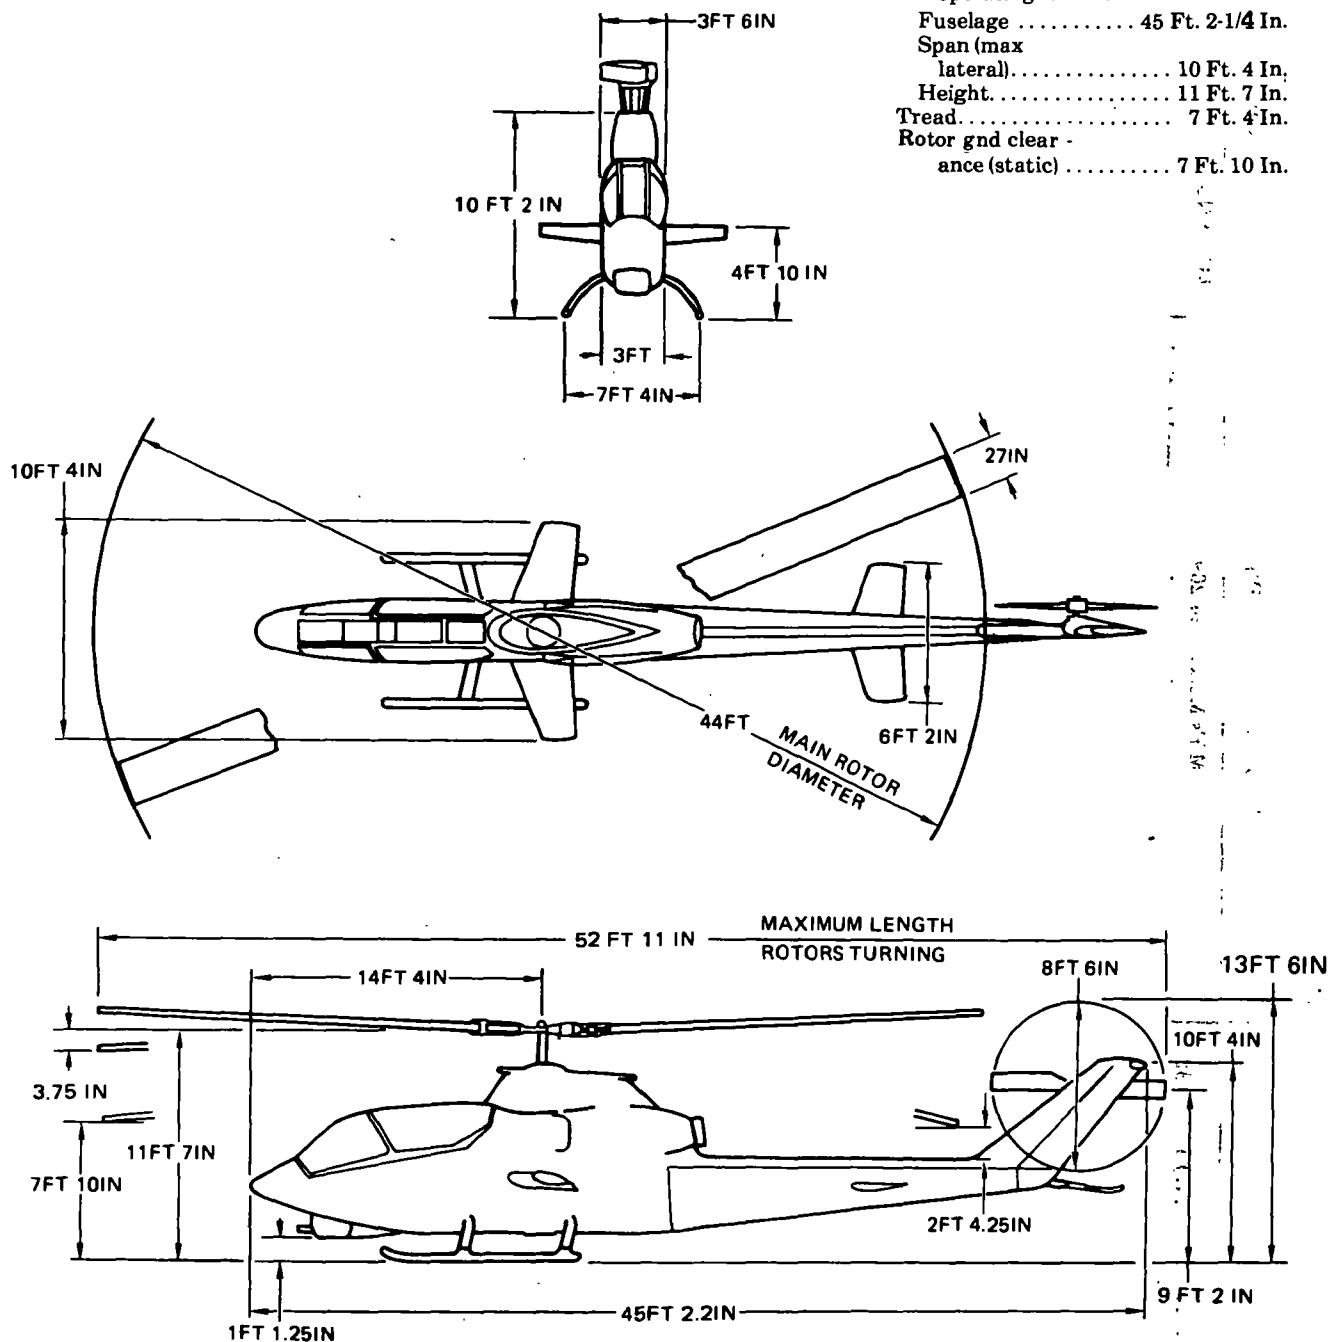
Principal Dimensions, AH-1G and TH-1G
